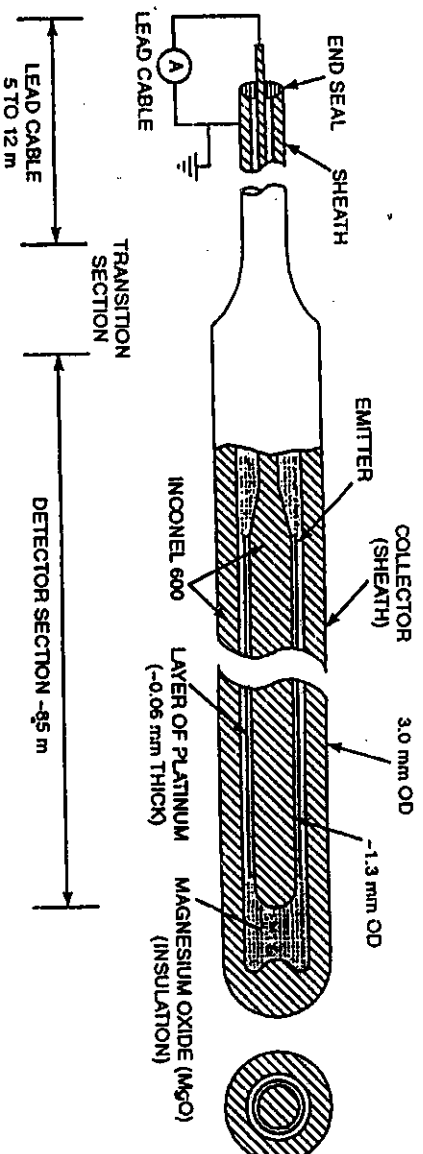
Pt-Clad SIR In-Core Flux Detector and Assembly Well-Tubes
